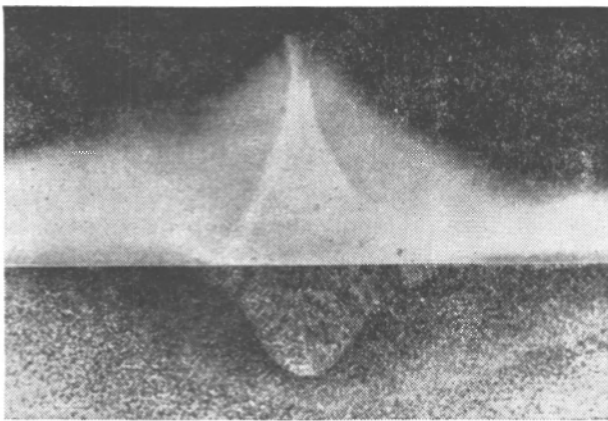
Argon-Shielded, inert-gas (Consumable) arc showing fine spray-type metal transfer.
